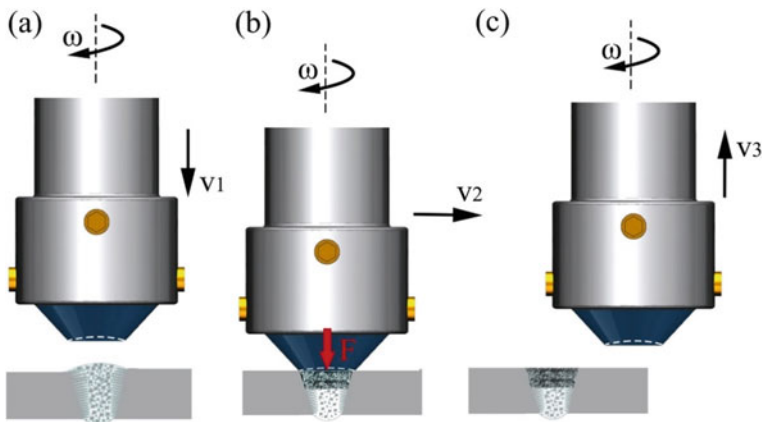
Keyhole closure technique of TIG filler wire welding with subsequent FSP: a TIG filler wire welding, b FSP and c completion of keyhole repairing
